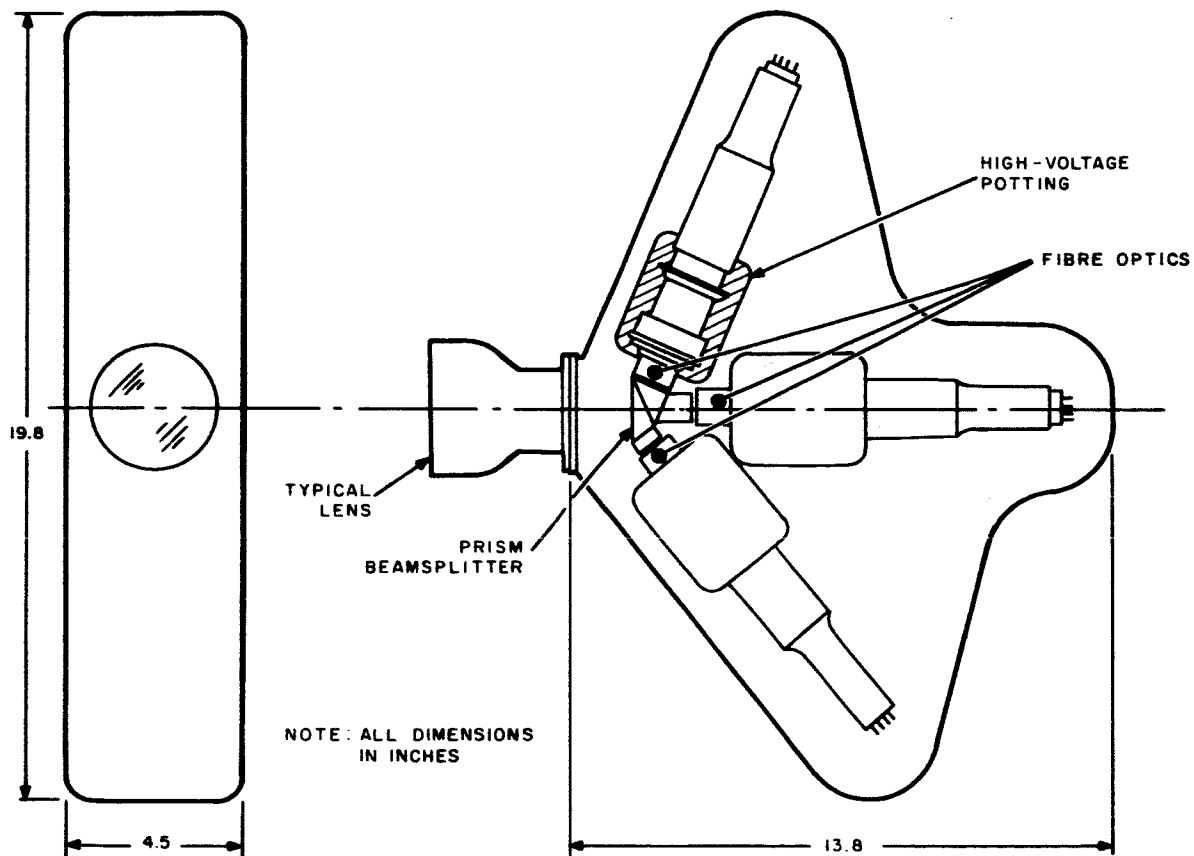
Package Outline for Camera Head Using Three SEC Tubes
